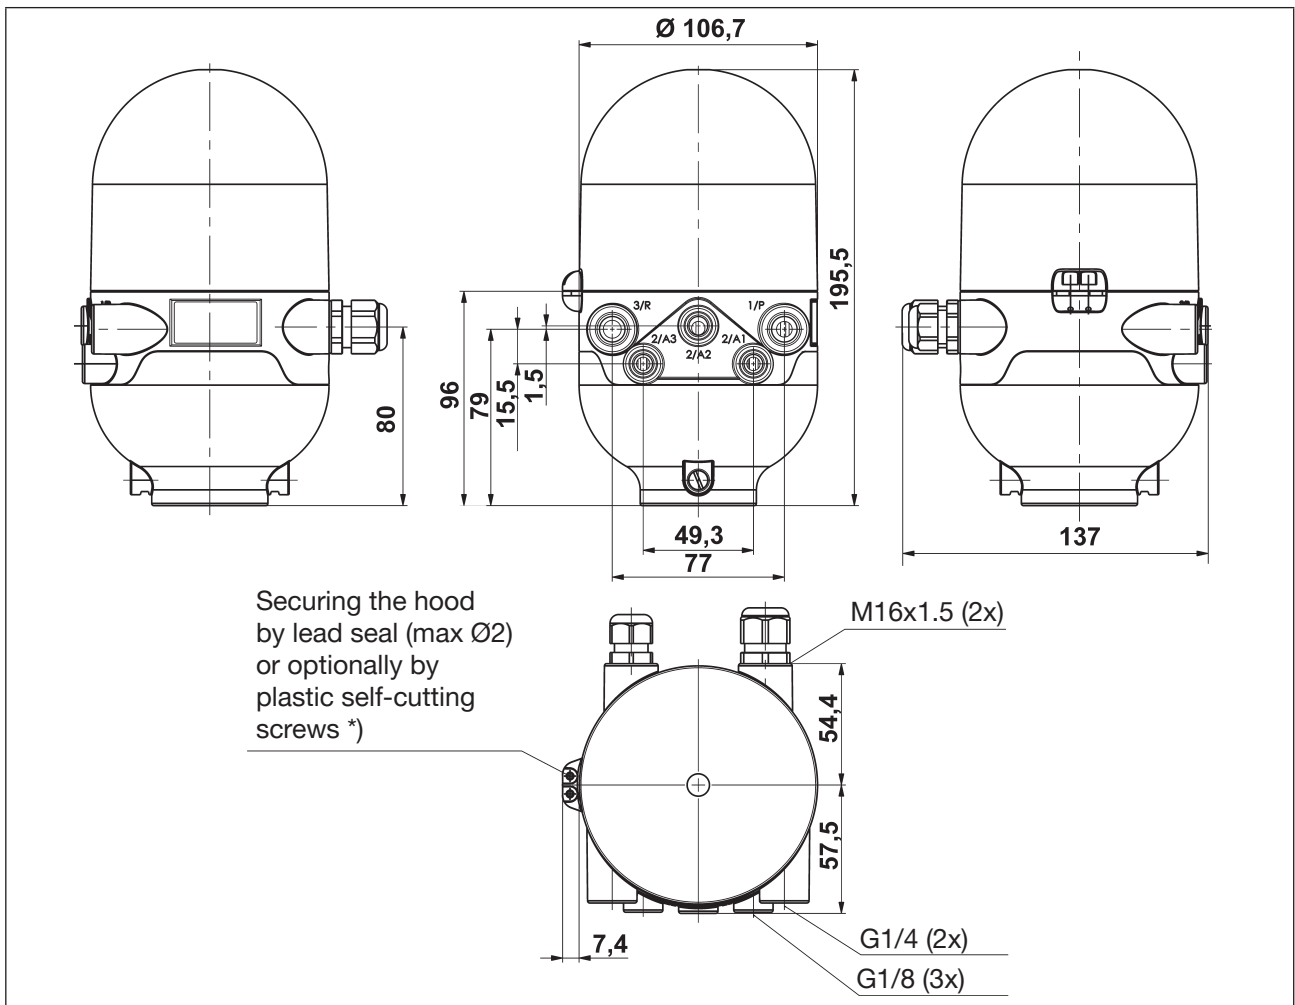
Dimensional drawing (for designs with 1 to 3 solenoid valves)
